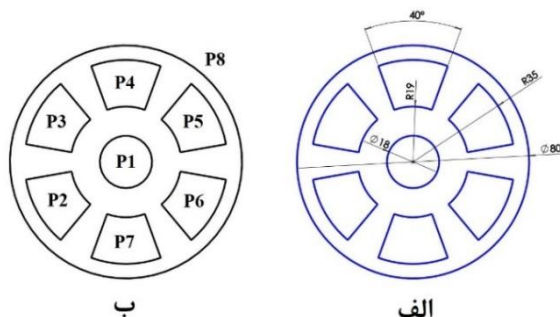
a) Sheet metal workpiece of example 2 b) Operating punches for example 2
